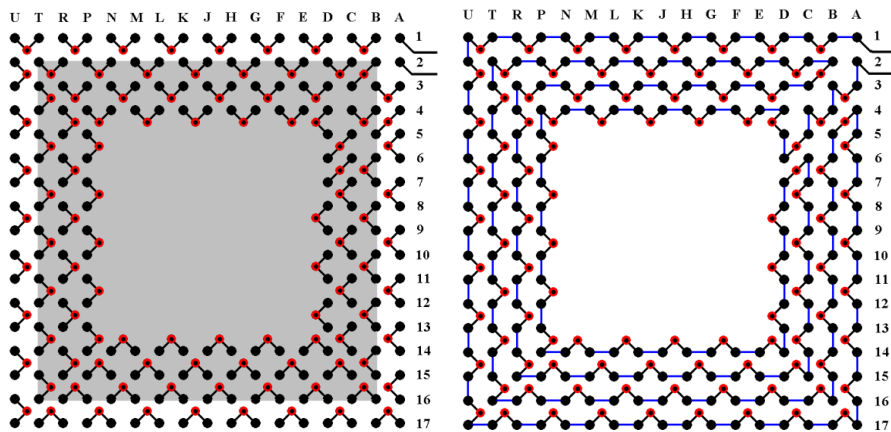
Daisy-chain interconnections for the BGA208 on the board (left image) and the complete daisy chain (right image). Larger (black) dots represent solder pads and smaller (red) dots vias. The grey square shows the size of the chip in the component.
